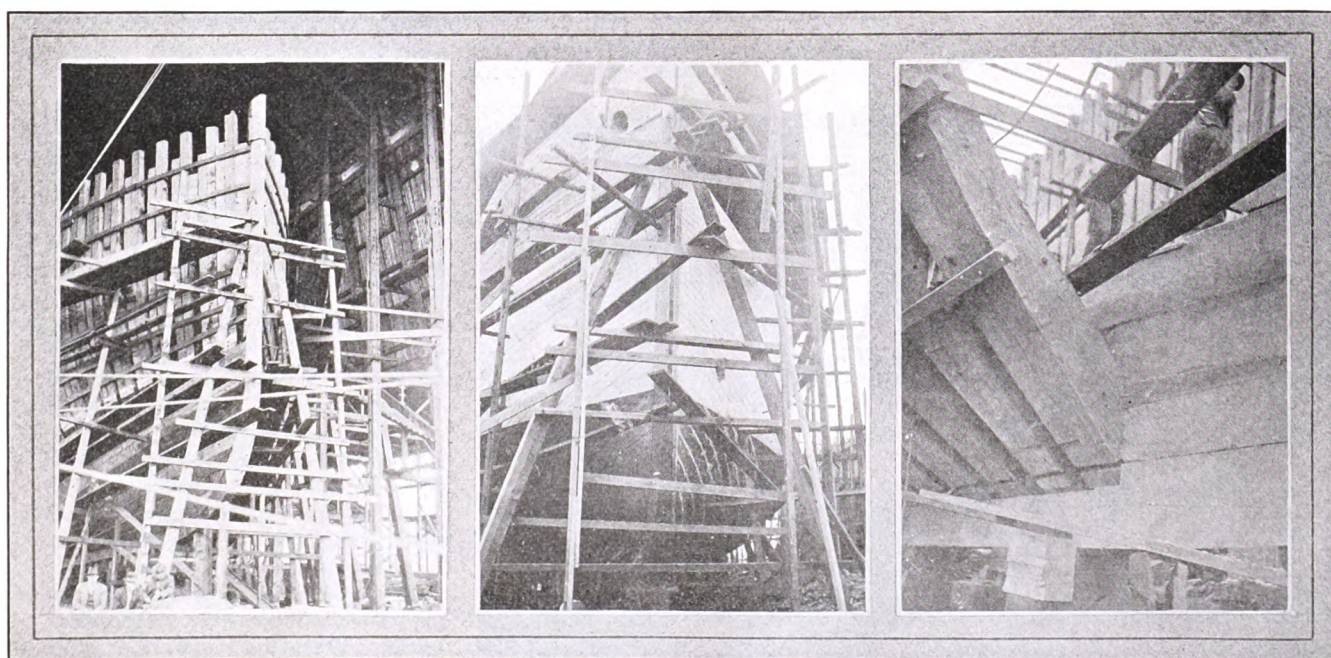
STEAMER TYPE BOW UNDER CONSTRUCTION, PARTLY PLANKED. FIG. 95—STEAMER TYPE BOW FINISHED WITH STAGING STILL IN PLACE. FIG. 96—FORWARD CANT FRAMES HEELING TO DEADWOOD
